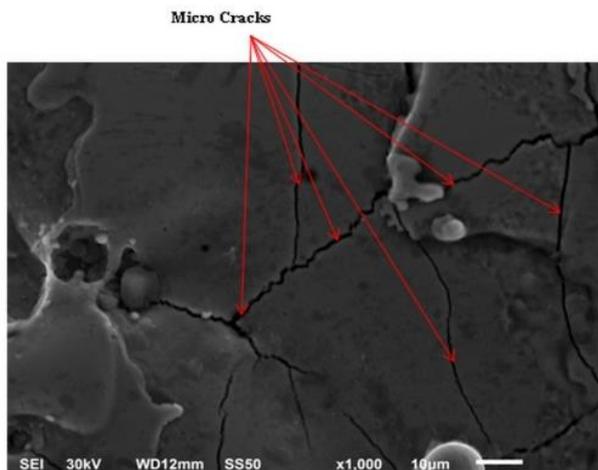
Micro-cracks on the surface machined with unblended dielectric
